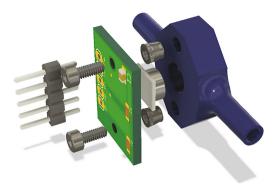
Exploded render of PCB parts, sensor, and sensor adapter using Fusion 360.
